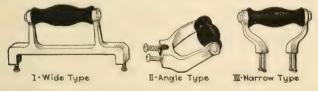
Types of spade-handles used on large-capacity multi-pole switches.
